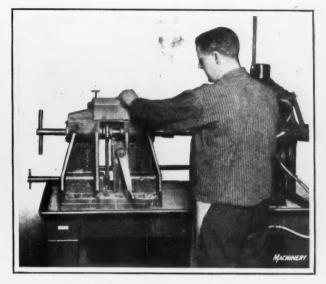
Special Machine employed for diamond-boring the Crank End of Connecting reds
